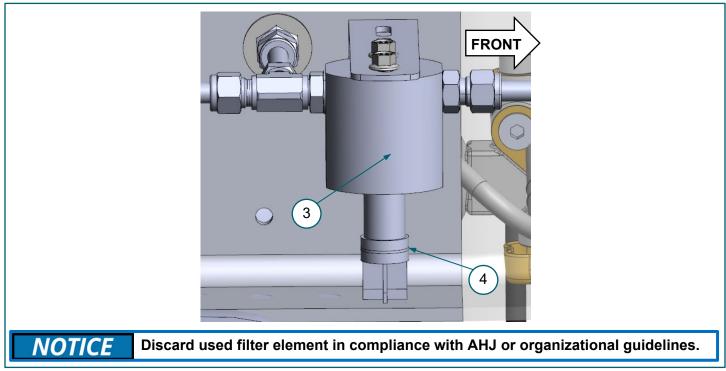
(3) HP fuel filter head, (4) filter element
